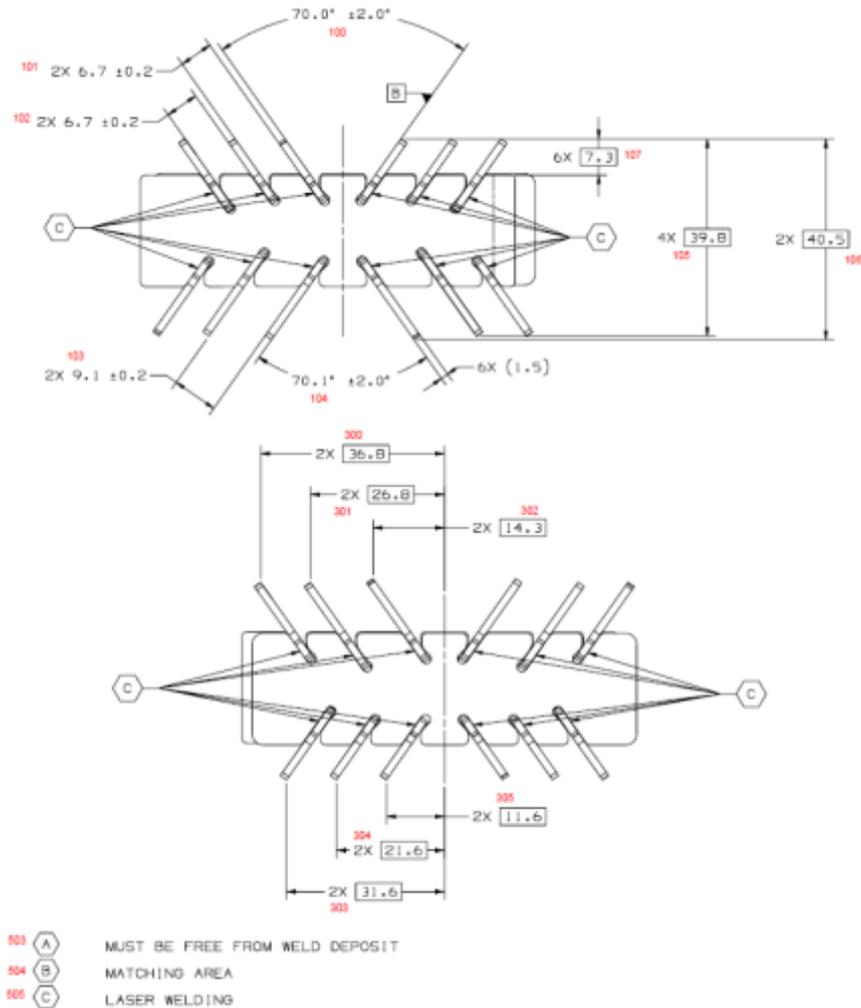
Stage 2 technical drawing, detail of welding points [7]
